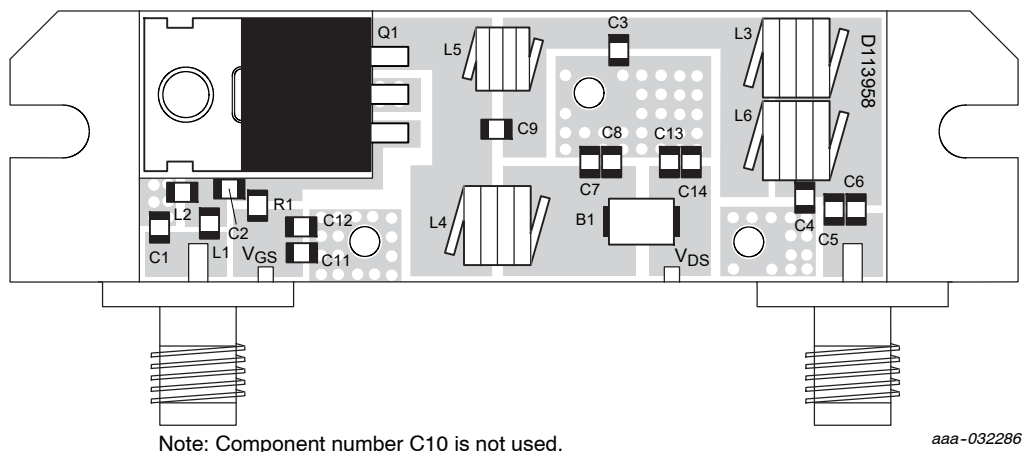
MRF101AN Compact Reference Circuit Component Layout and Assembly Example — 136–174 MHz
